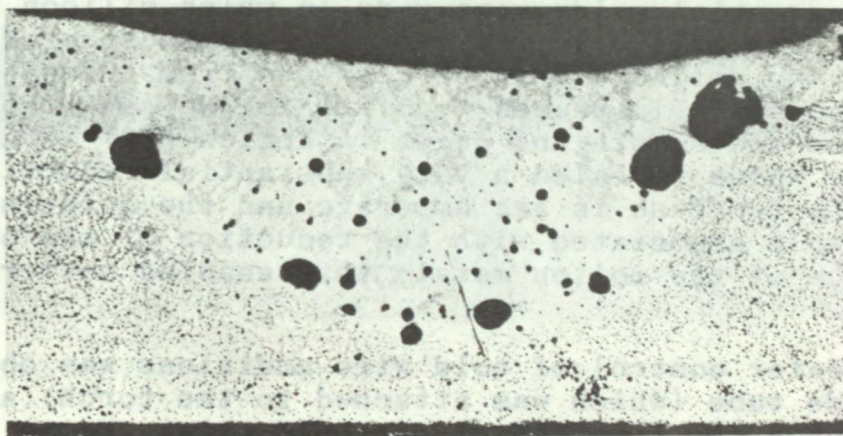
Cross-Section of Autogenous Weld Showing Extreme Porosity. X4
